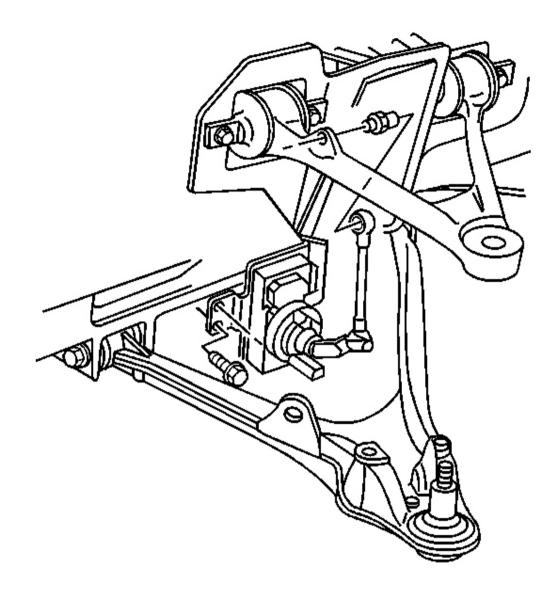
ESC Sensor Link Courtesy of GENERAL MOTORS CORP.
